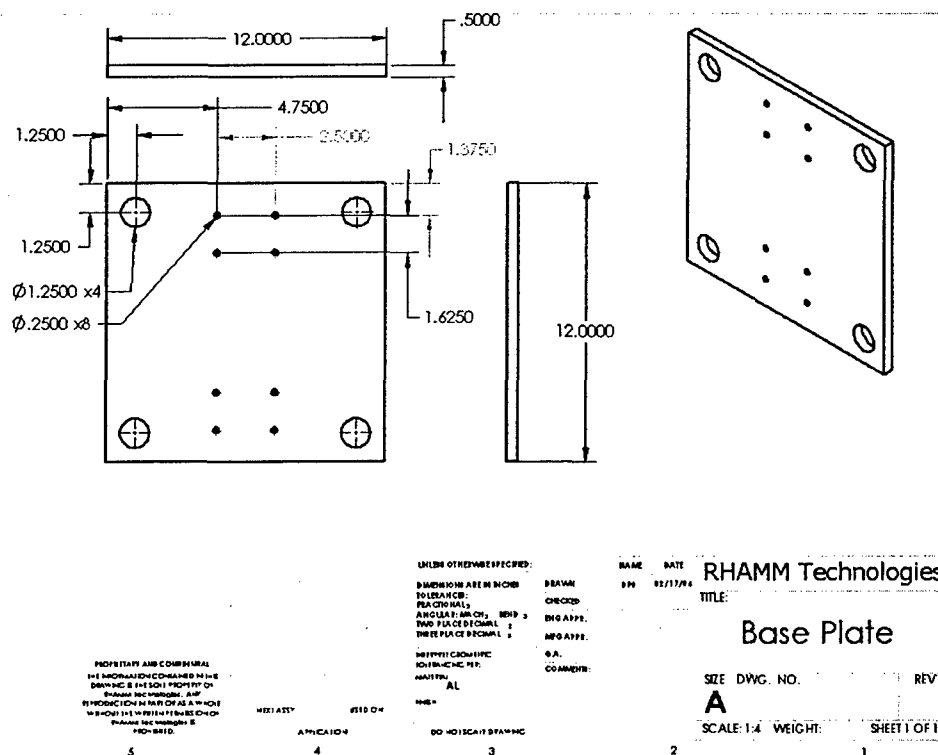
Drawing for DCB High Rate Experimental Apparatus: Base Plate.
